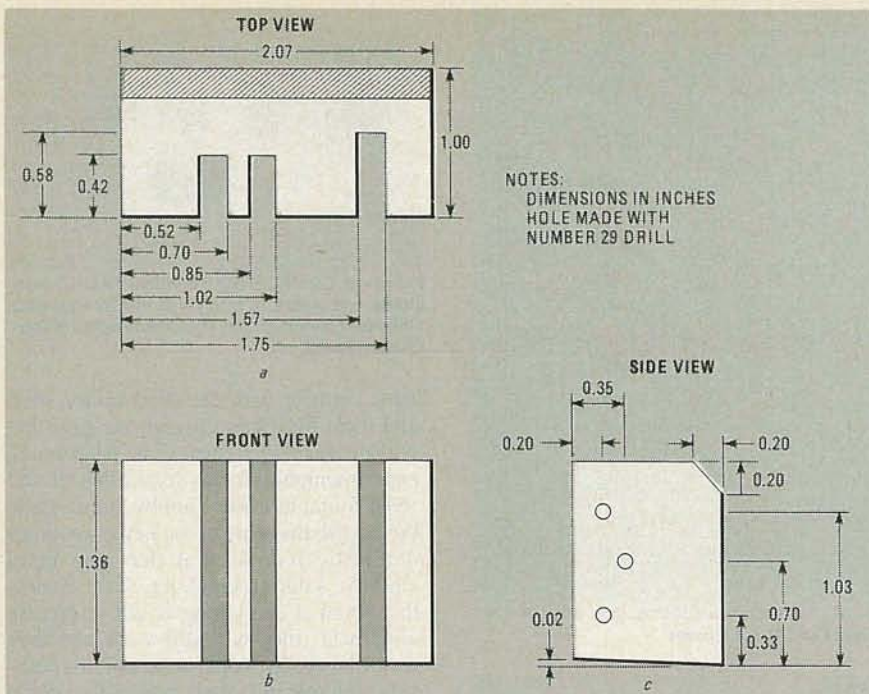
BEARING BLOCK DIMENSIONS must be followed closely. The dimensions shown are in inches. All holes are made with a #29 drill.
